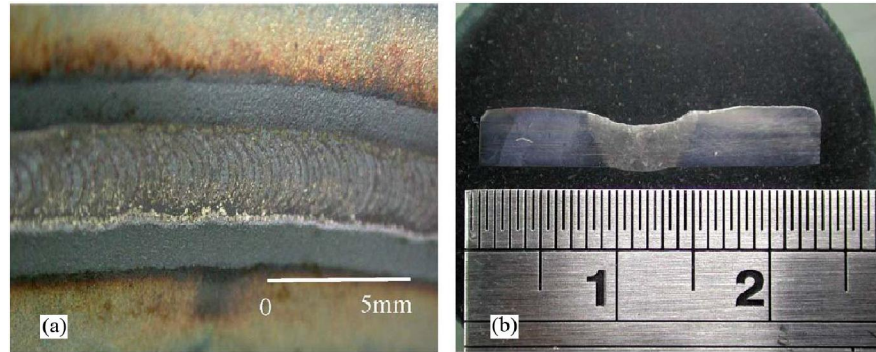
(a) Macrograph of a grooved weld at 12 O'clock location. (b) Fusion zone section at 12 O'clock [9]
